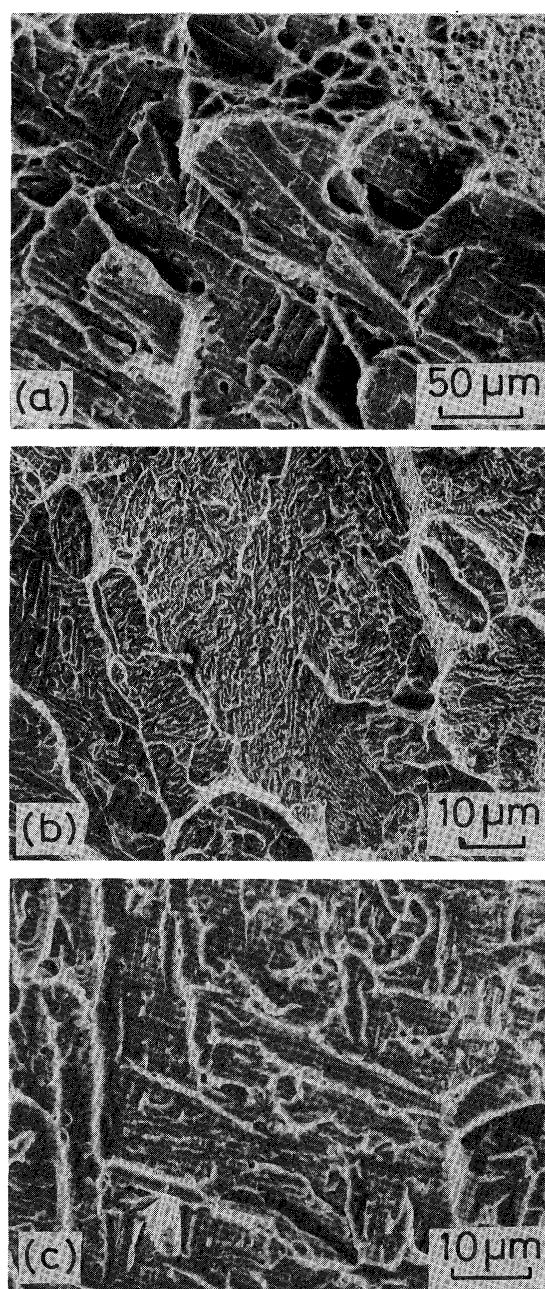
Fracture morphology of weld metal by type 316L filler metal.
